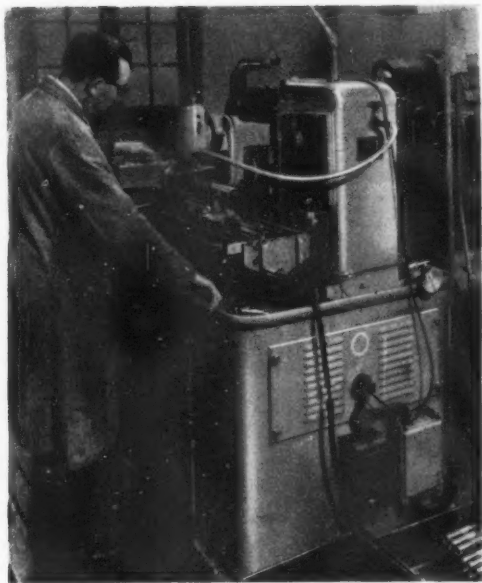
Centec 3R Production Milling Machine Set Up for Producing Slots in Opposite Sides of the Final Drive Spindle
